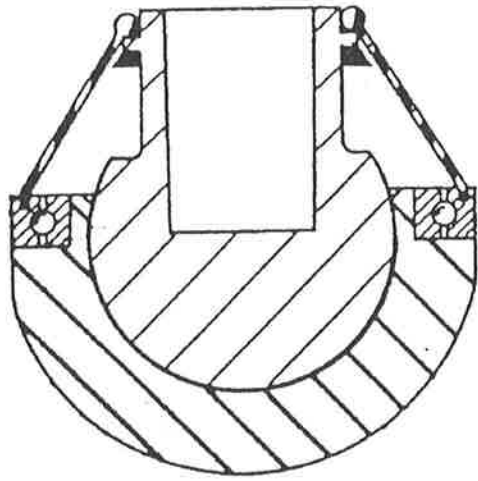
(Top) A drawing of the sealed modular bearing unit sub assembly. The bearing is sealed at a groove in the acetabular insert and a small flange at the base of the modular head. An opening taper has been incorporated on the acetabular insert.
